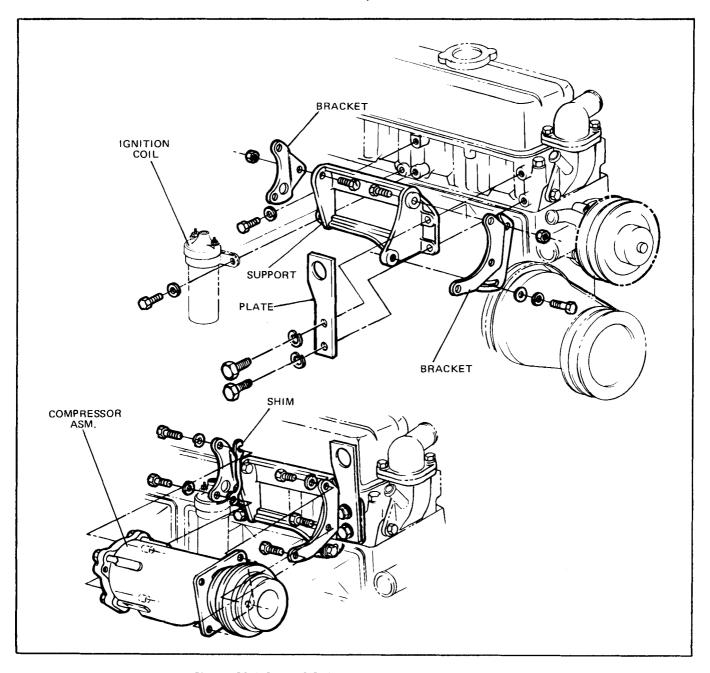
A-59 A Series 6-Cylinder Engine Compressor Mounting
